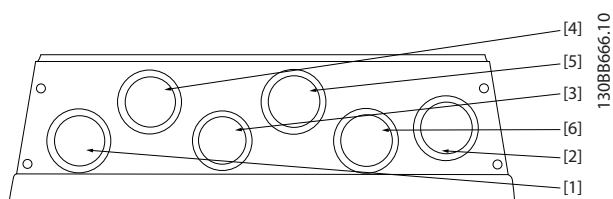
Enclosure Size A4, IP55 Threaded Gland Holes
